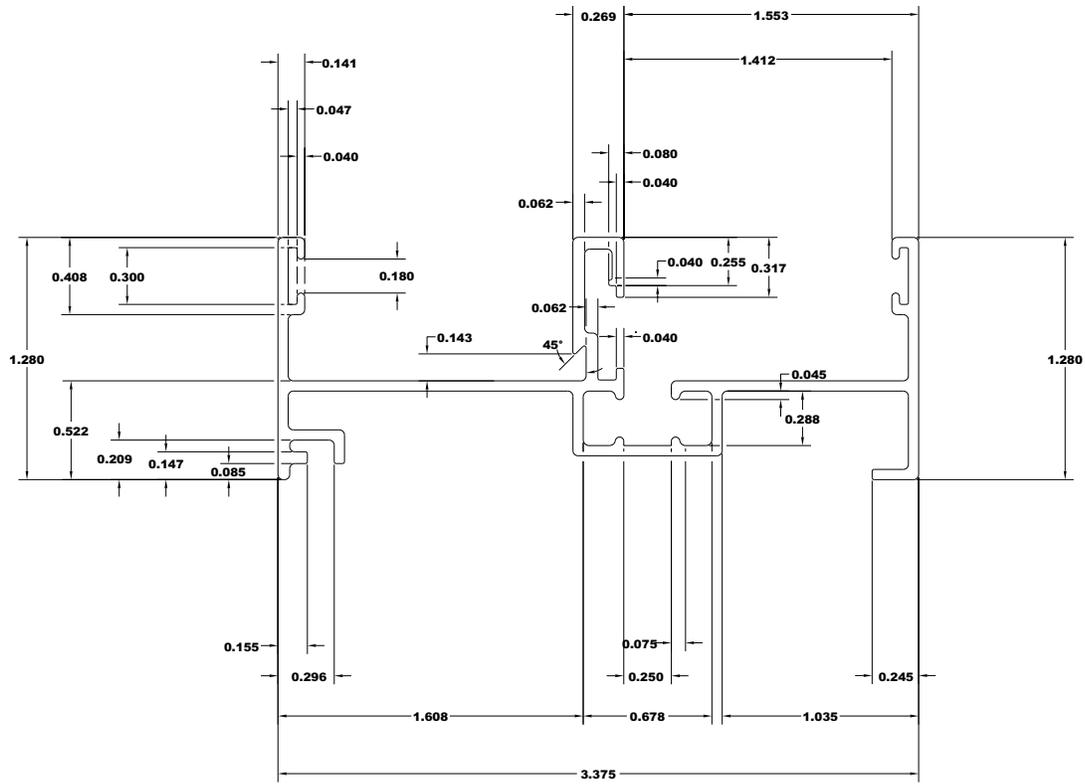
Fixed Jamb Drawing for Horizontal Aluminum Slider.
